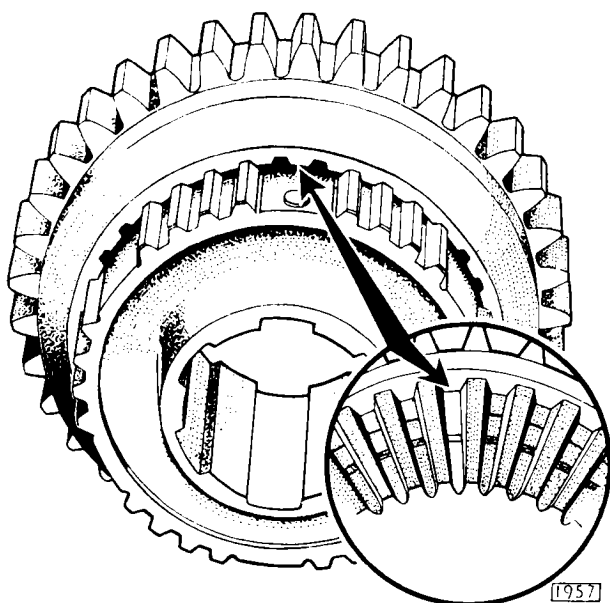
When fitting the 1st speed gear to the 2nd speed synchro-sleeve the relieved tooth on the internal splines must be in line with the stop pin in the sleeve
